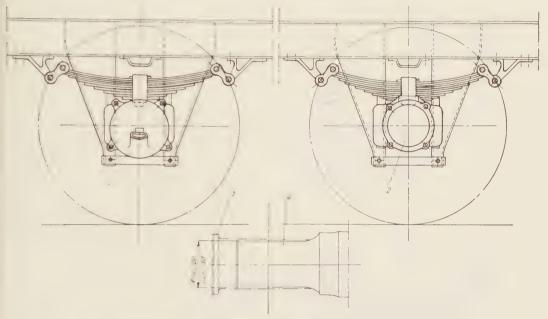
The replacement of plain bearings by roller bearings on goods wagons and four and six-wheeled carriages.
